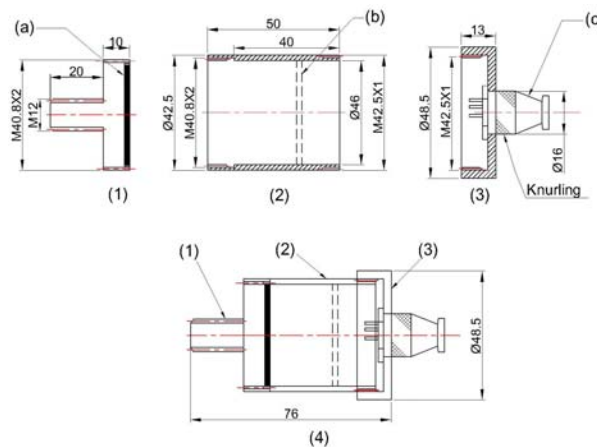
Vibration sensor assembly detail (1) bottom part (2) Main body with signal amplifier card (3) Top part with circular connector, (a) MEMS PCB and (b) amplifier PCB
